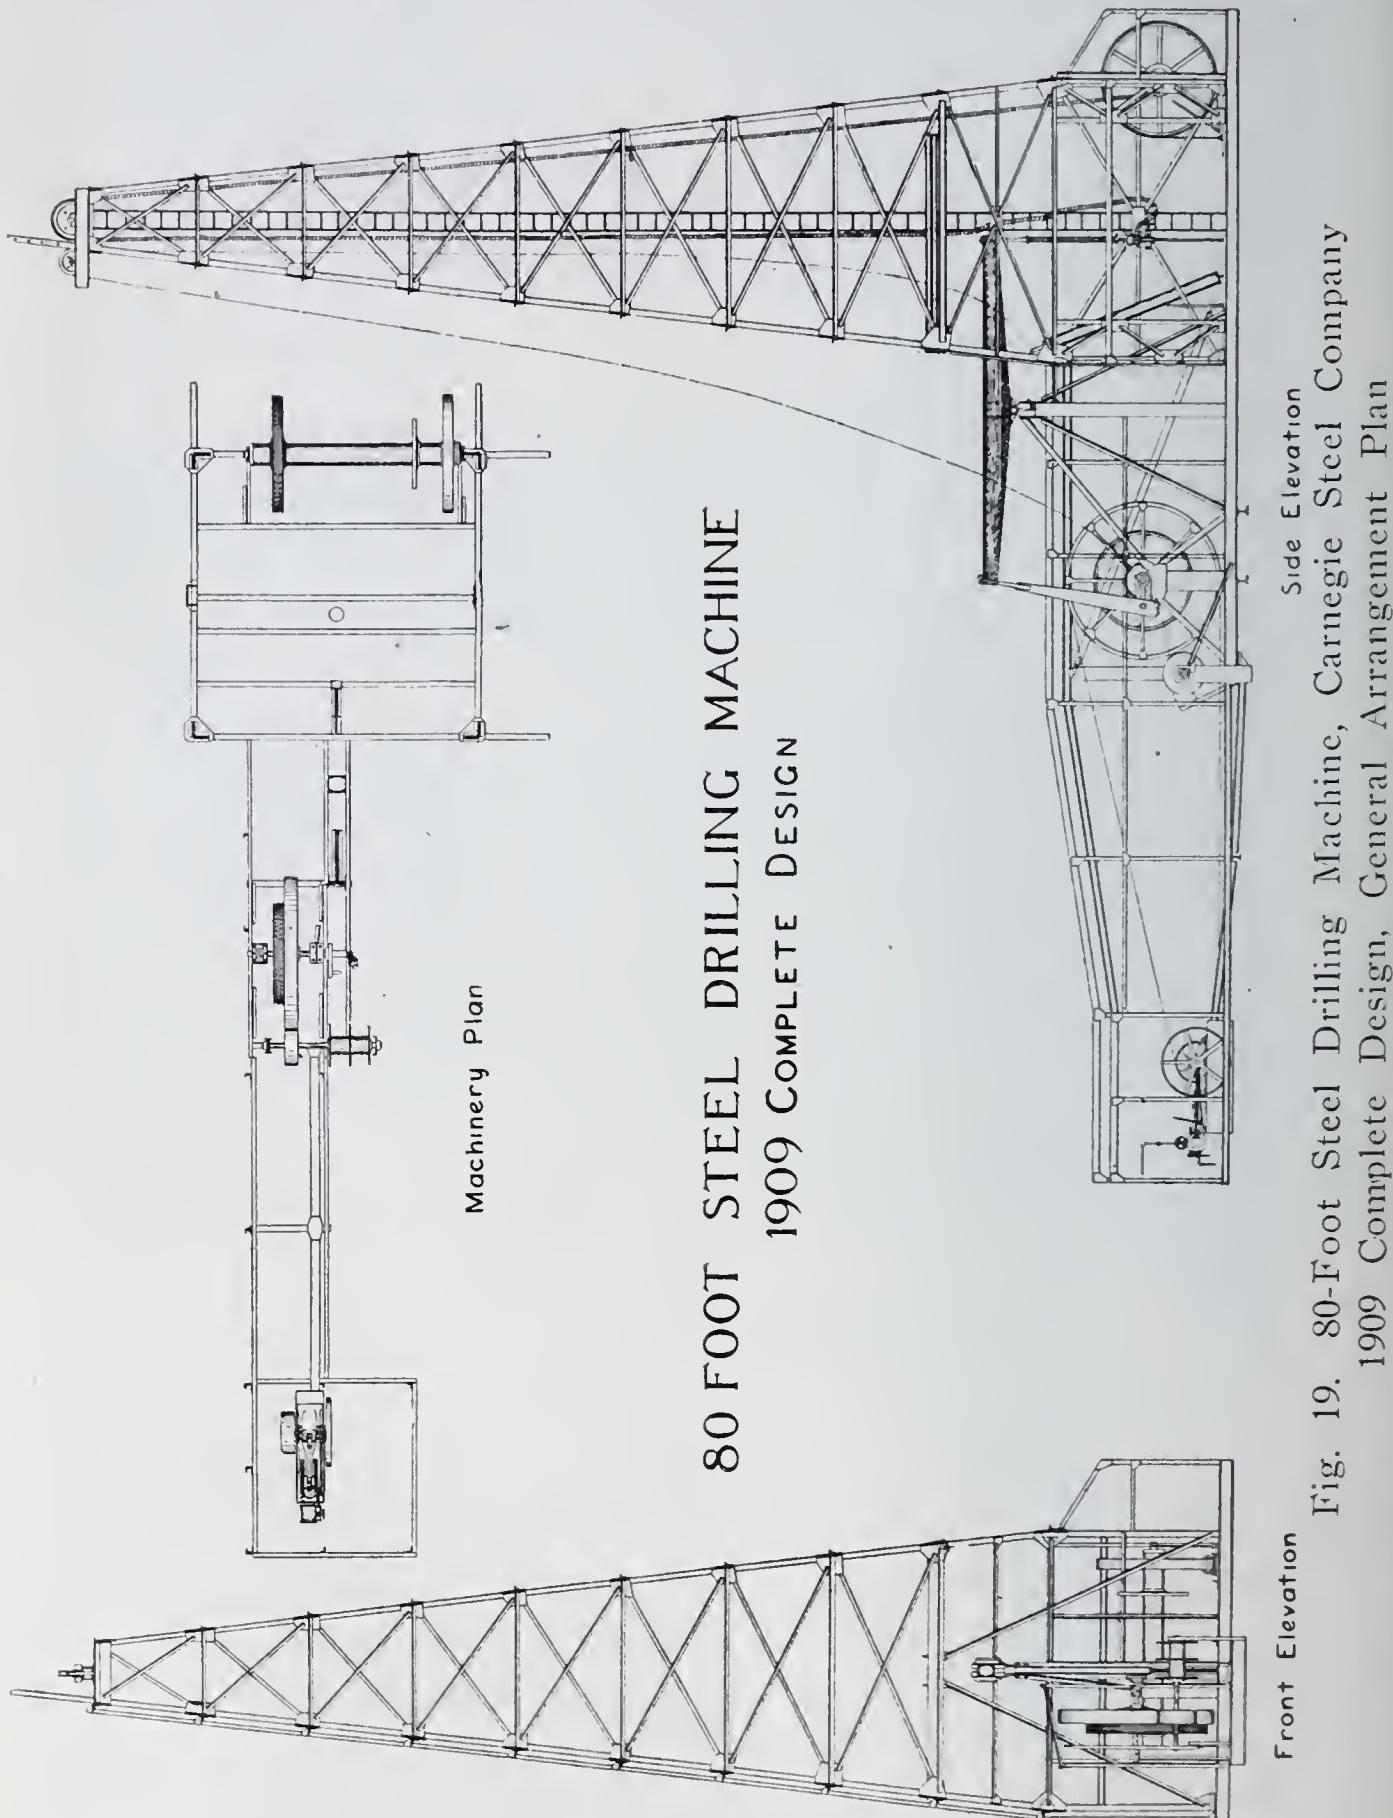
80-Foot Steel Drilling Machine, Carnegie Steel Company
